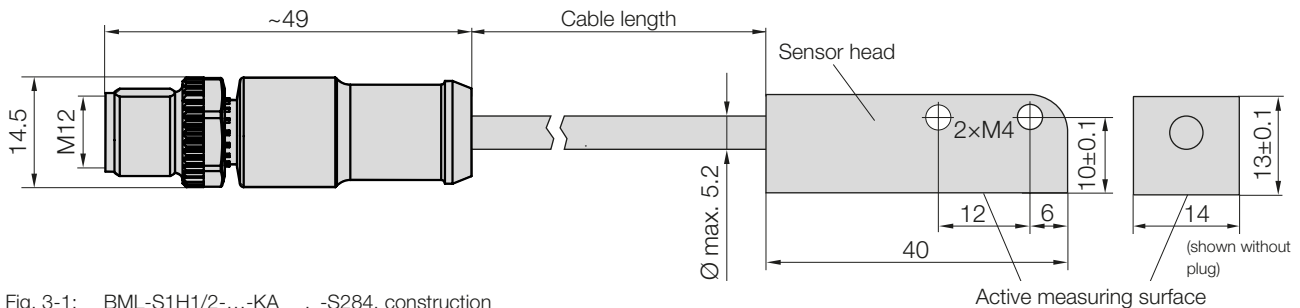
BML-S1H1/2-...-KA_-,_-S284, construction
